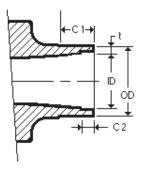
Opt-24 Butt Weld End Connection
